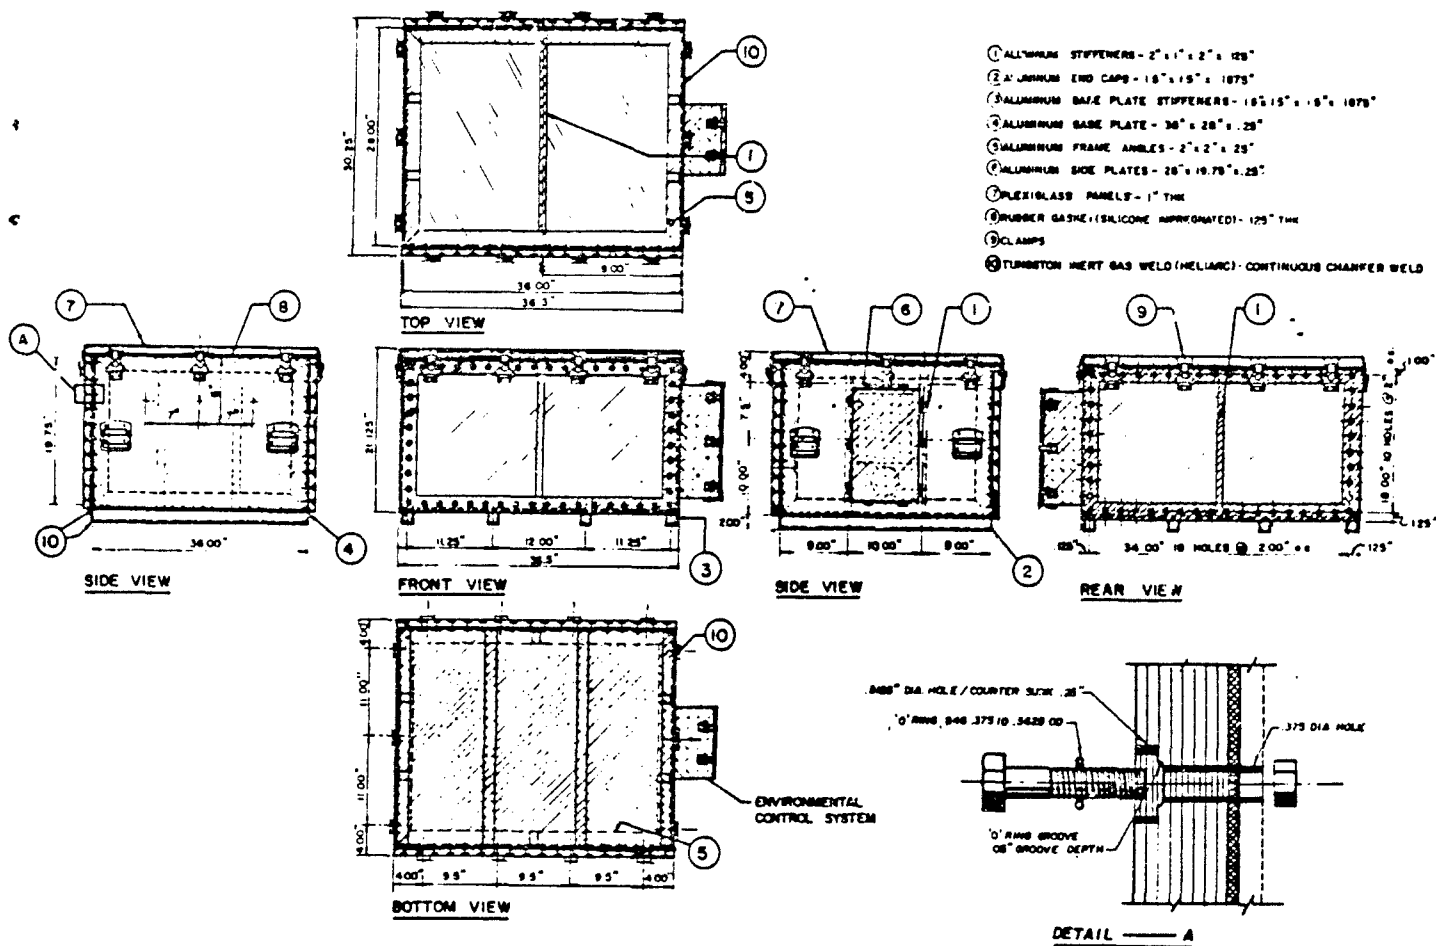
Specific views of assembly along with dimensional and engineering data. Detail A shows the installation of the bolts used to retain Plexiglas[®] sides to the frame.
